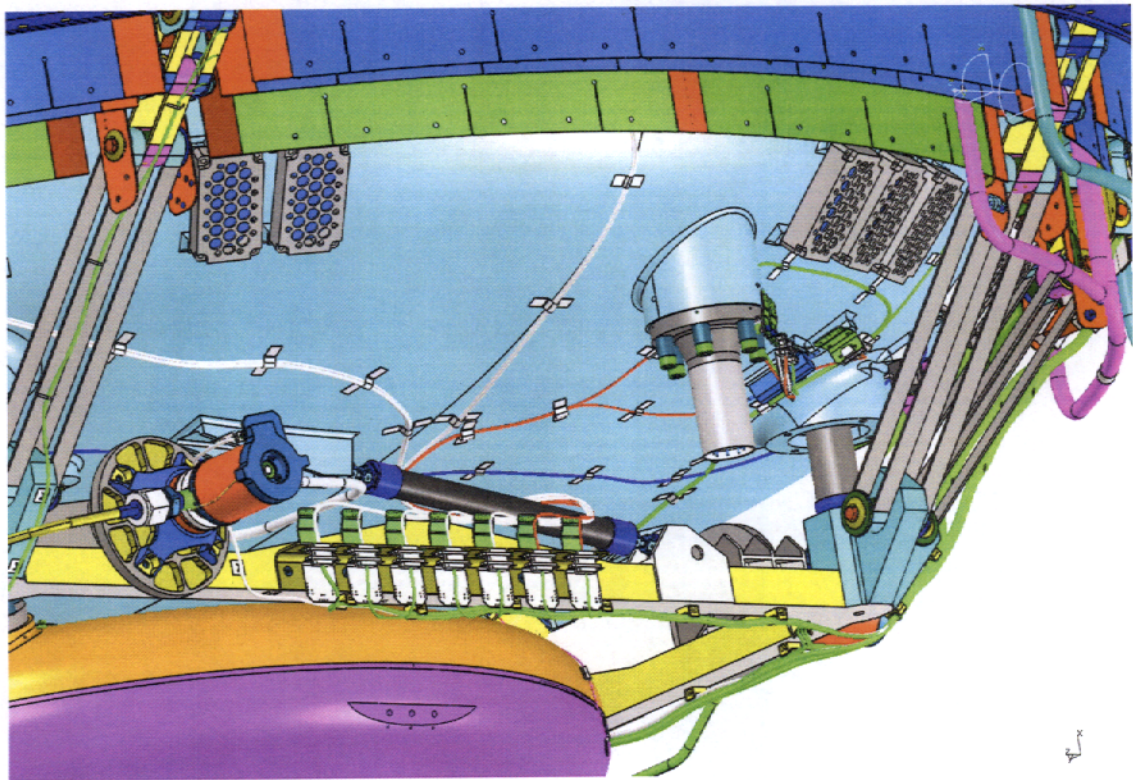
PFM CCH to lower SFW I/F-CB and to Cryo-Control-Components
